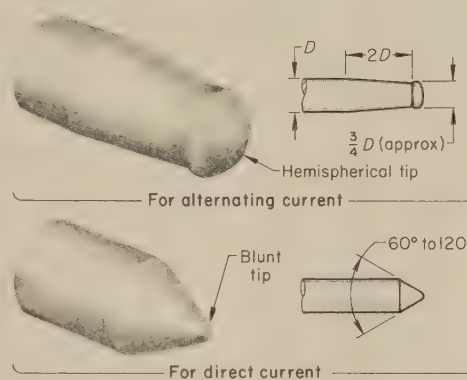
Electrode tips used for gas tungsten-arc welding of aluminum alloys
